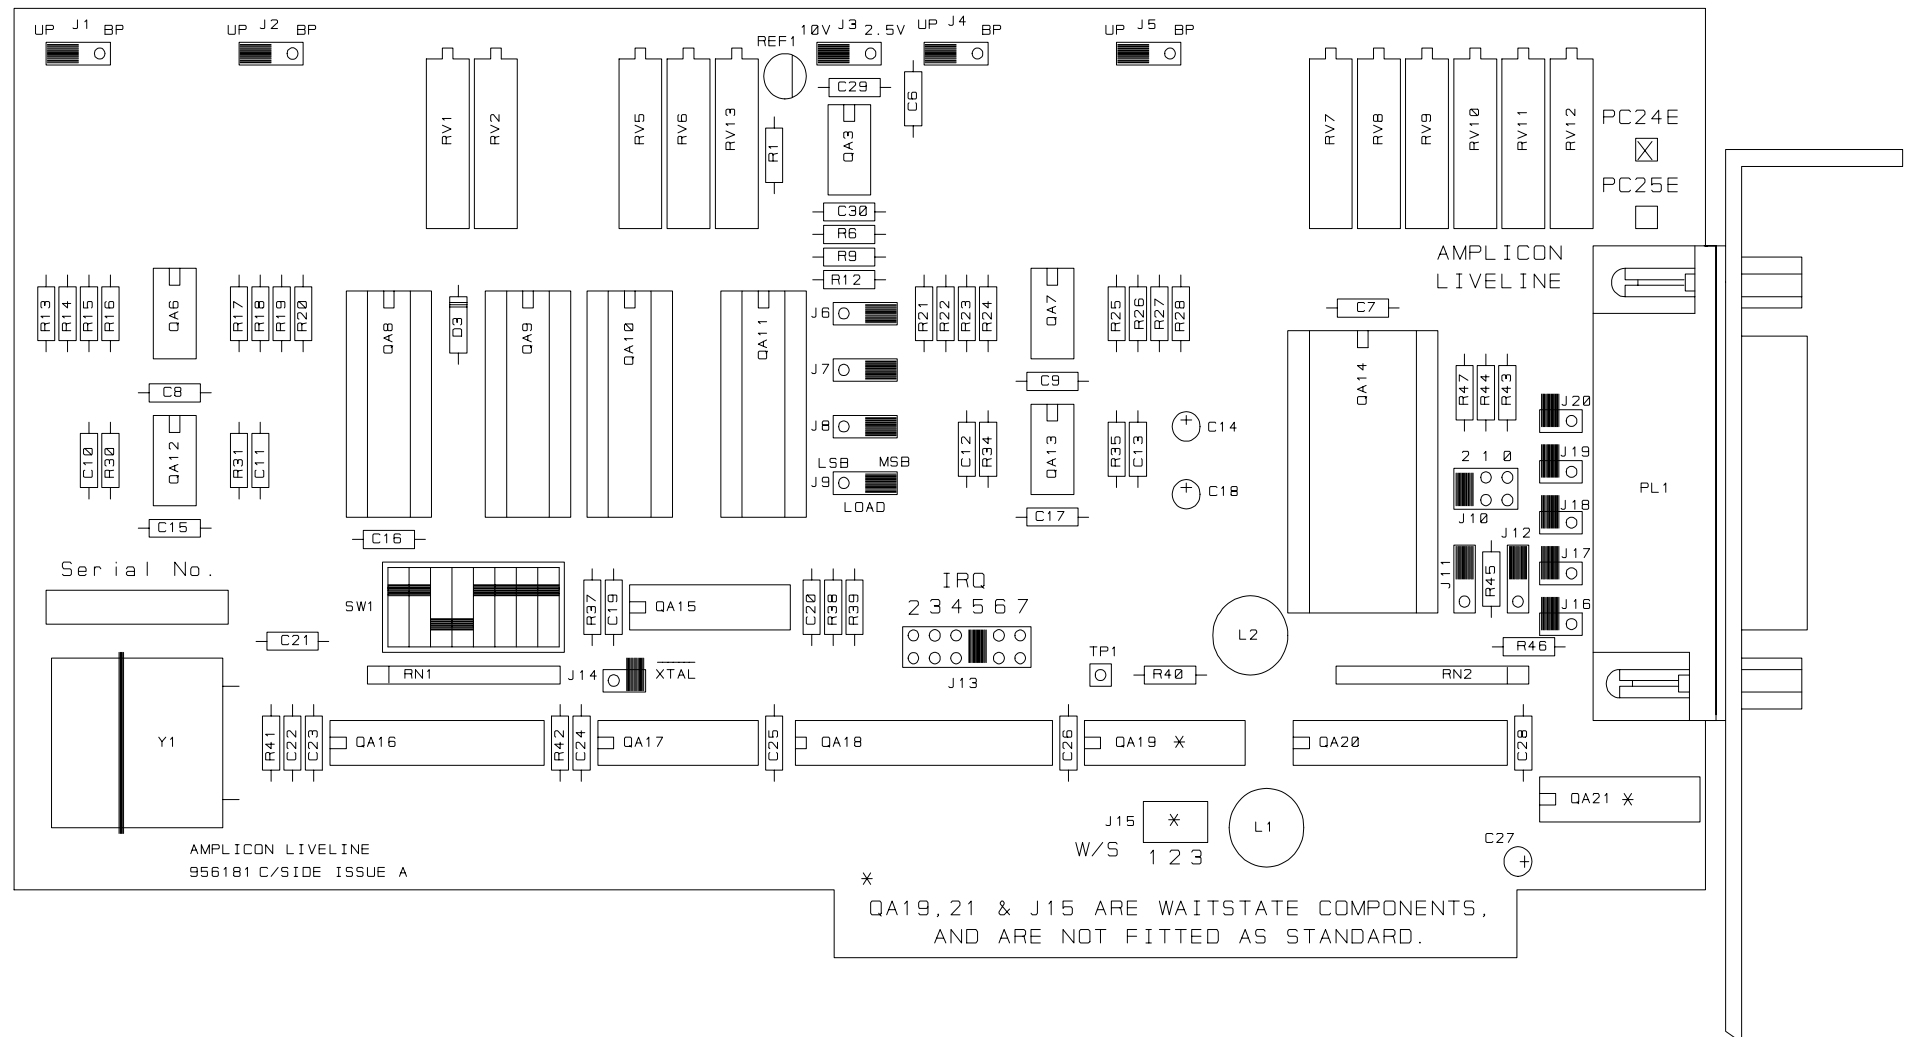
PC24E PRINTED CIRCUIT BOARD LAYOUT
